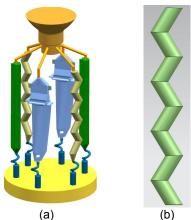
Casting cluster arrangement (a) and zigzag casting (b)
